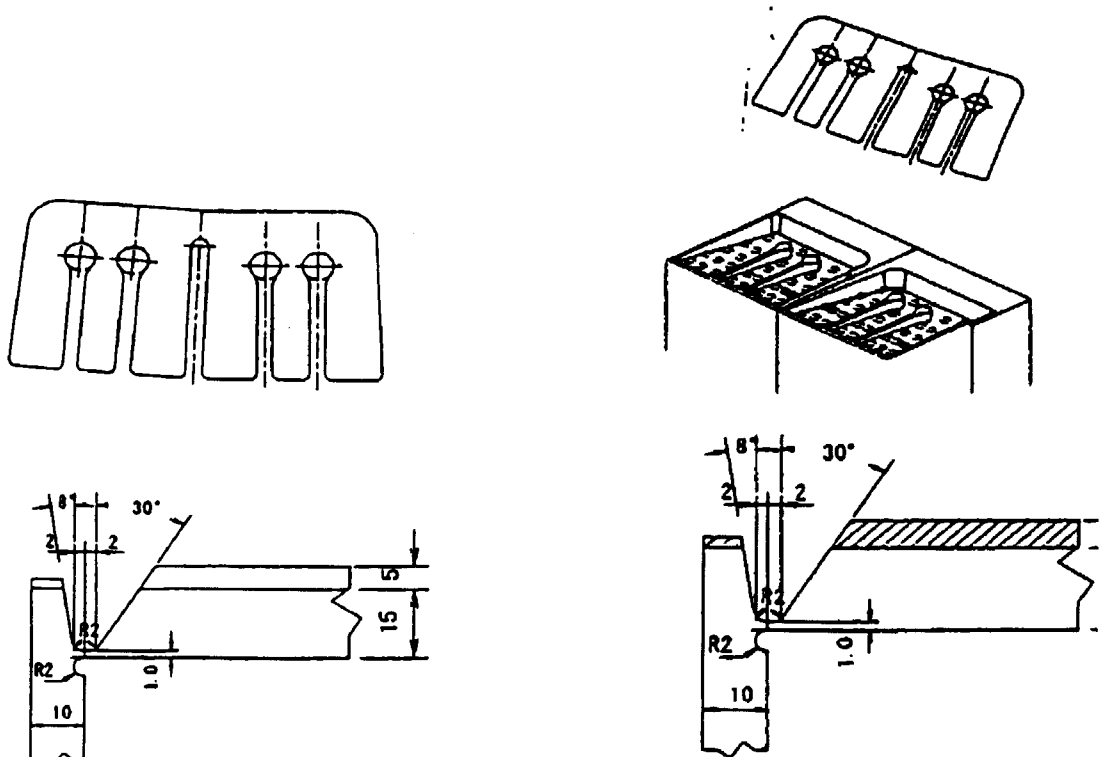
(13) Shaping and machining finish of header cap plates
